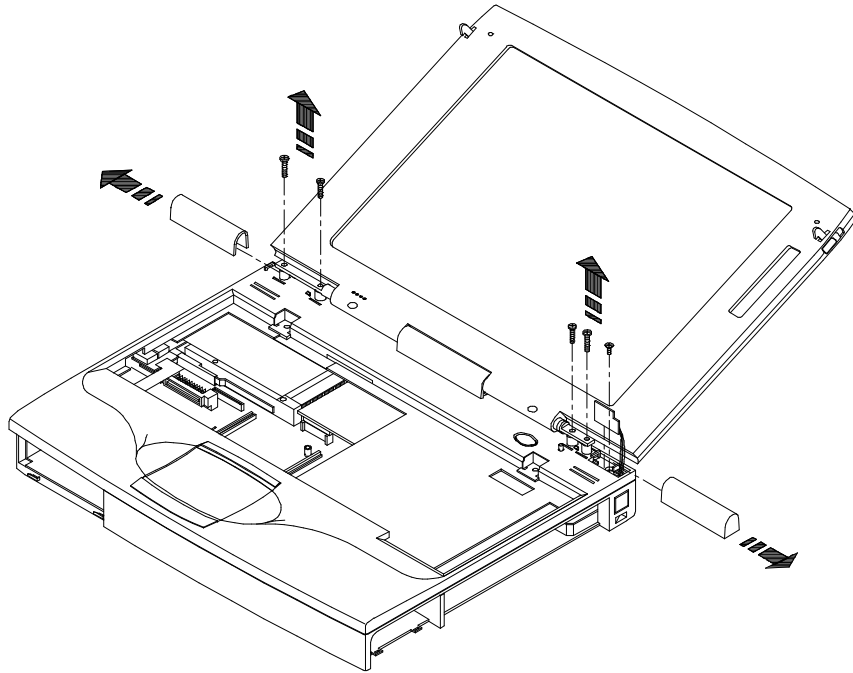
Removing LCD Assembly End Caps and Hinge Screws
